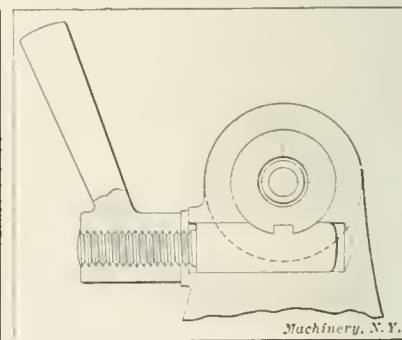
Clamping Bolt for Poppet or Tailstock Spindle
